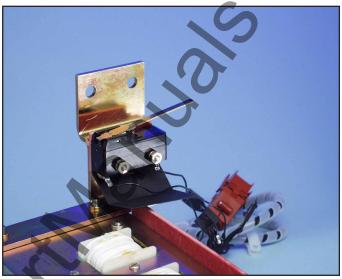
Overview: Auxiliary Switch Mounted to the Trip Unit / Aux. CT Module Assembly
